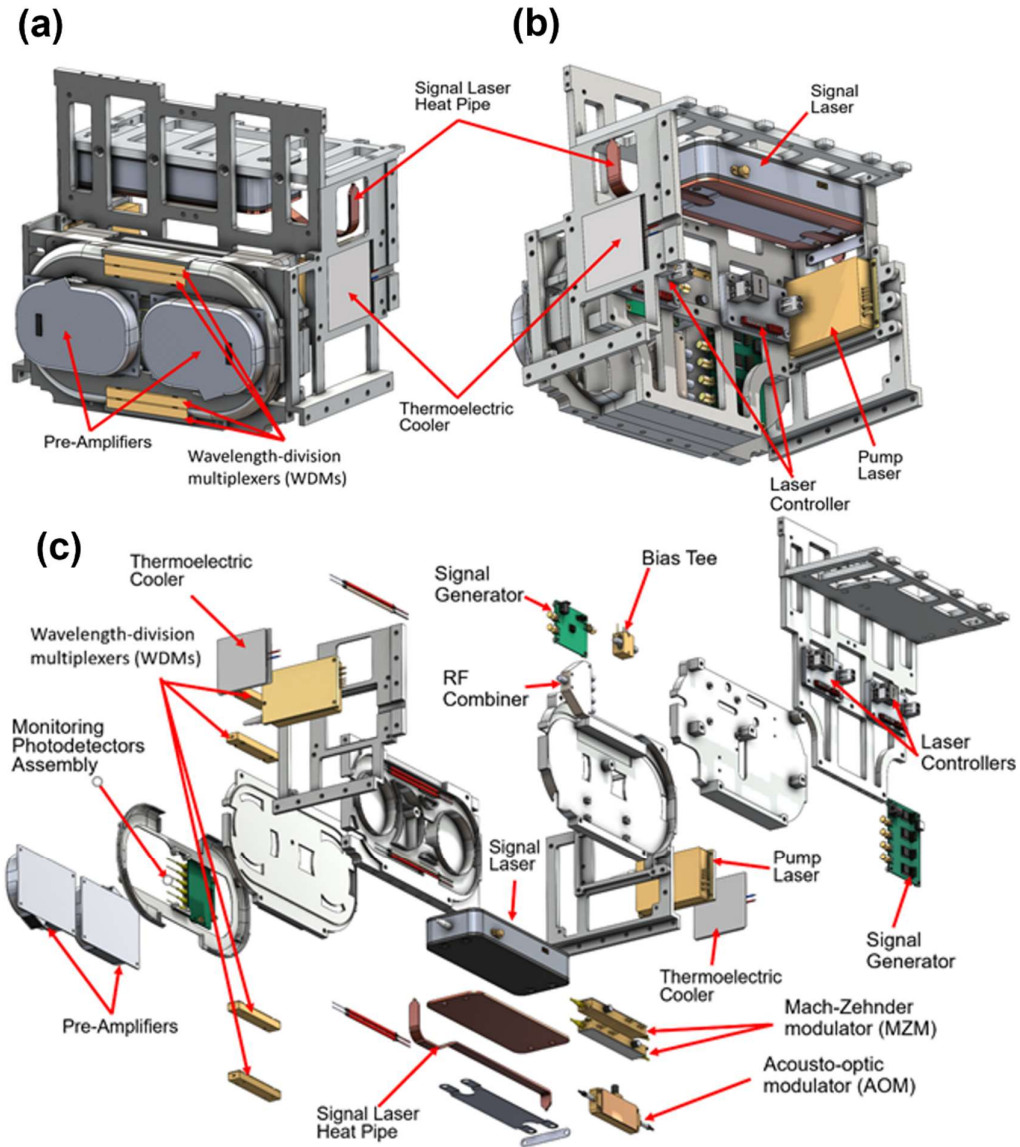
Complete laser assembly (a) front view, (b) rearview. (c) The exploded view of the laser assembly.
